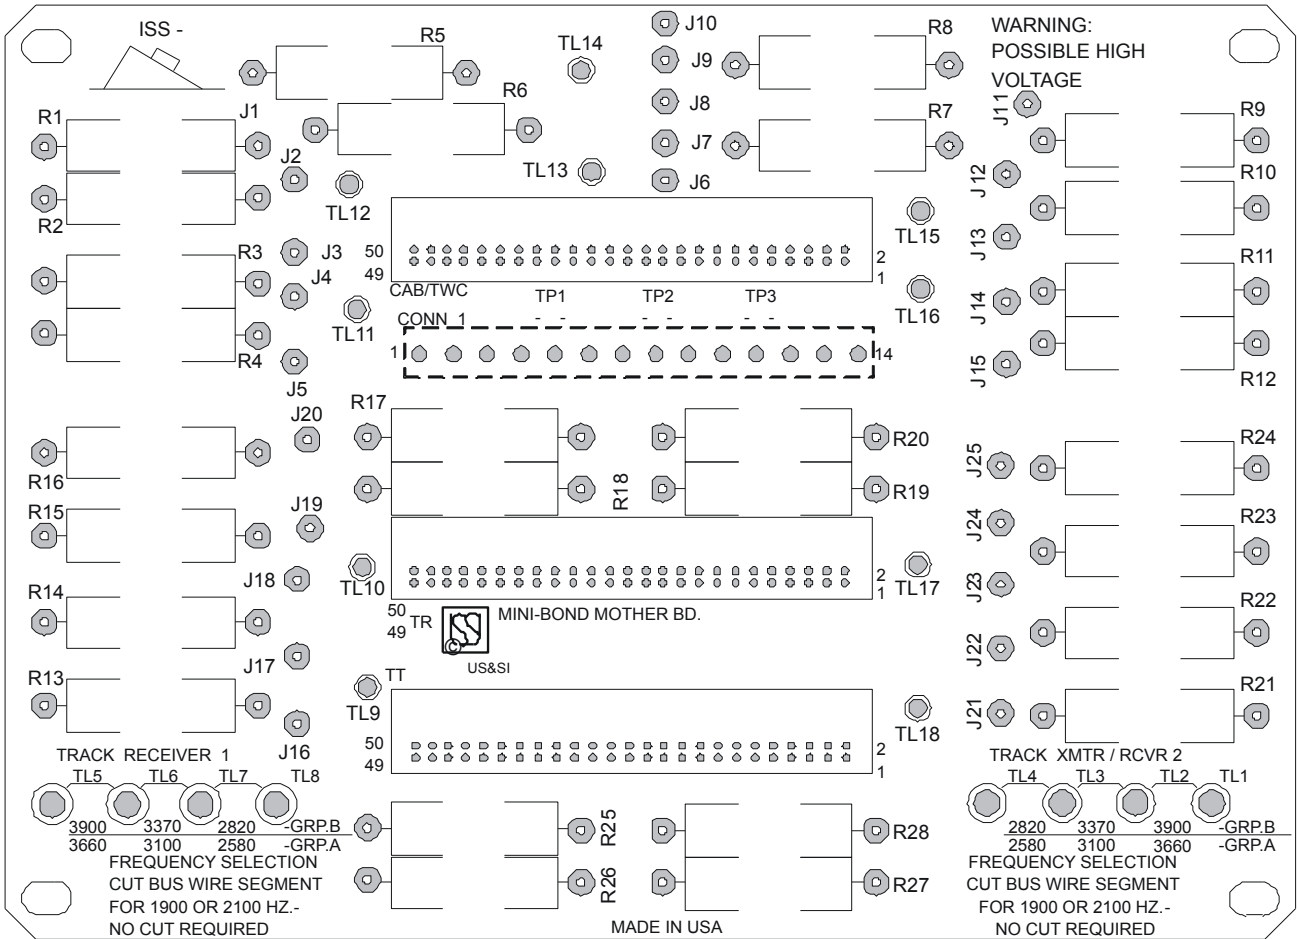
Part Location Diagram Tuned Minibond Assembly (Sheet 2 of 2)
